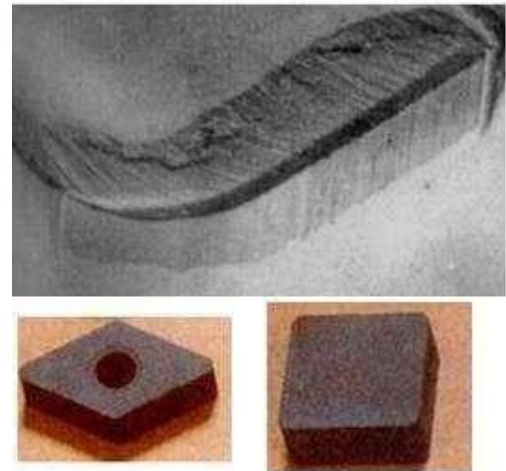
(c) Photographic view of the wear pattern of a turning tool insert
